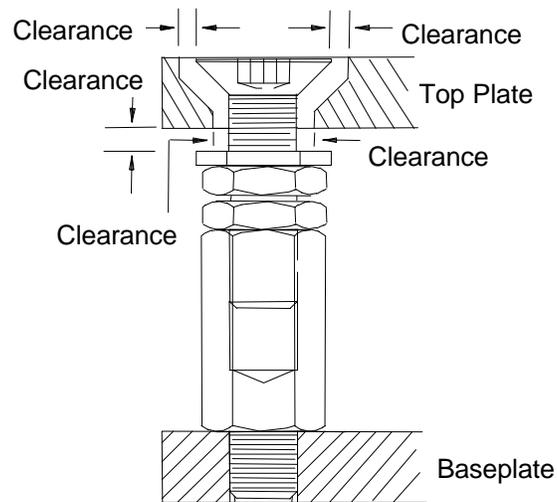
Hold-Down Bolt Assembly - Cross Section
